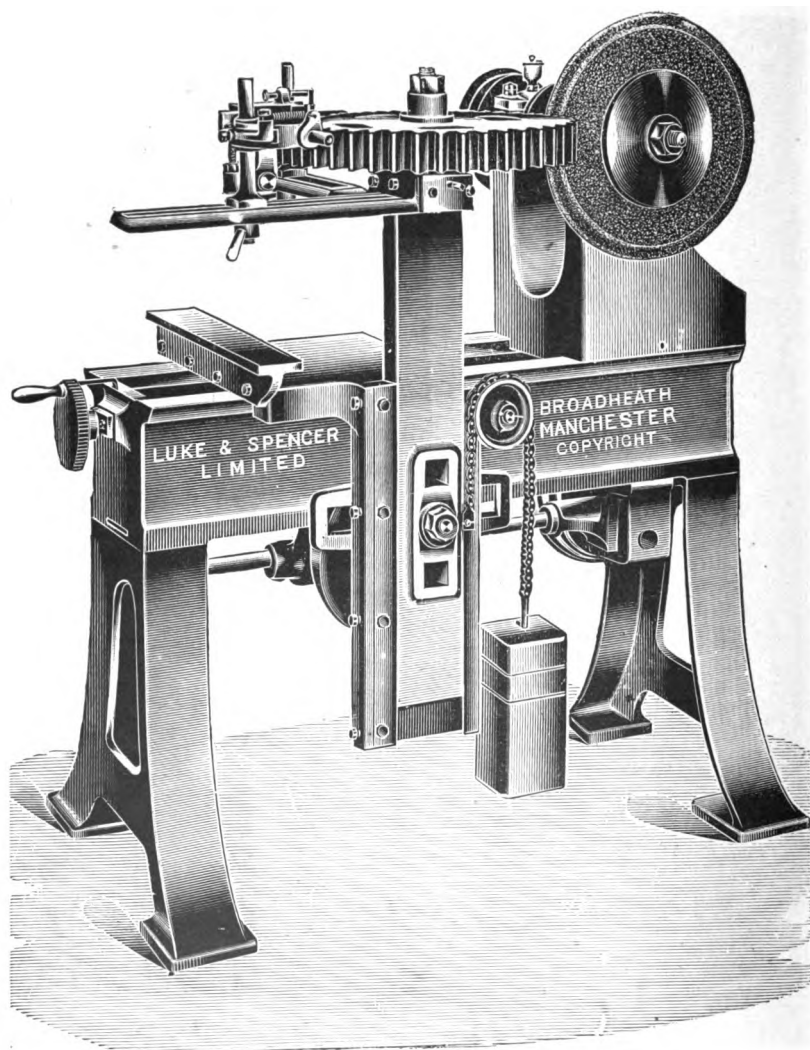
A. Self-Acting Wheel Tooth Cleaning Machine.
